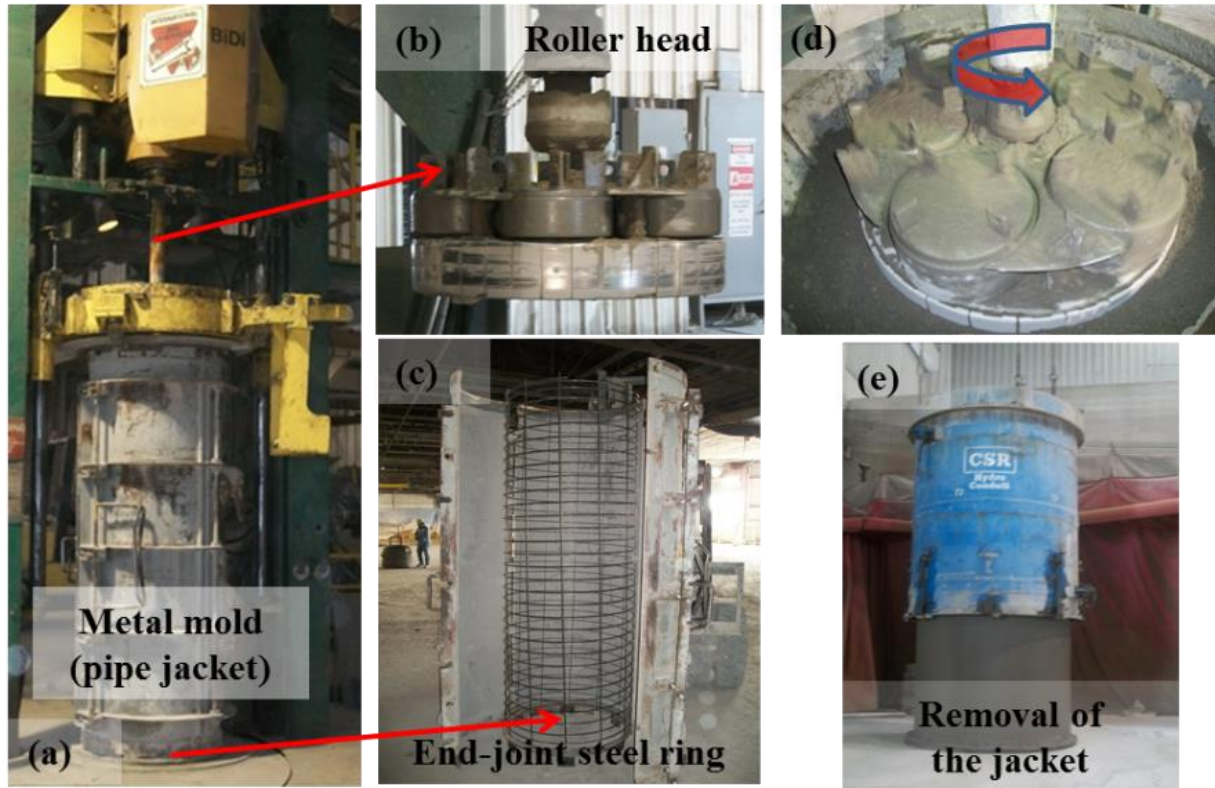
Pipe production: (a) production setup, (b) roller-head (called packerhead) (c) steel cage on the end-joint steel ring, (d) rotation of the roller head and (e) removal of the jacket.
